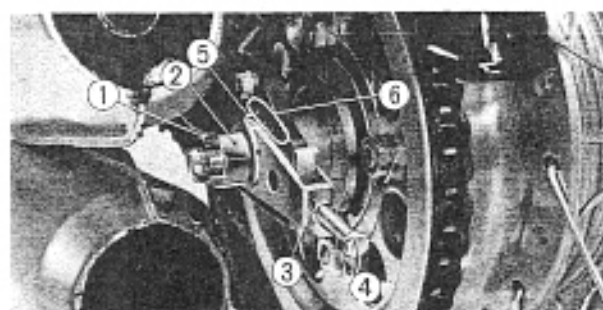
① Cotter pin ④ Adjusting nut
